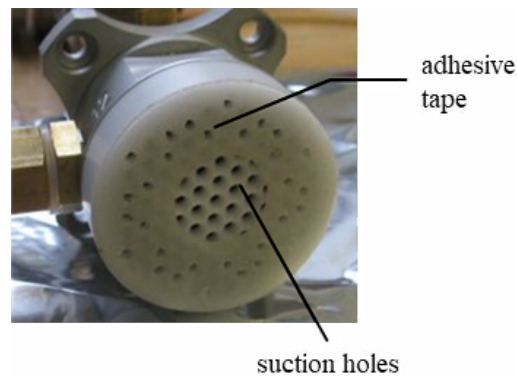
Redundant system with an additional adhesive tape that can hold the component in case of vacuum system failure
